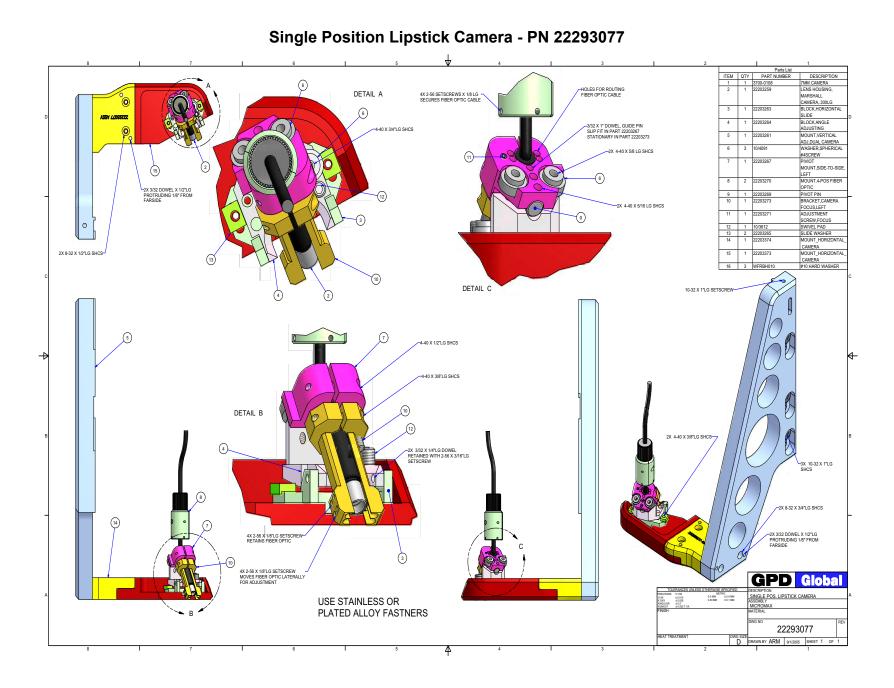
SIDE VIEWS - location of adjusting screws for fiber optic lights.)
